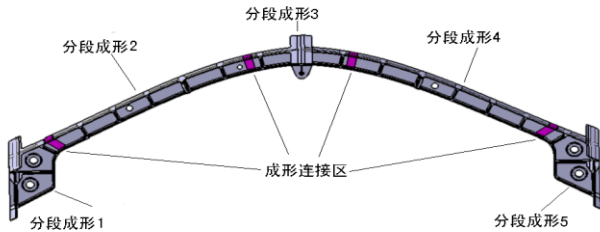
Technical design schemes of a large-scaled frame-beam integral component
